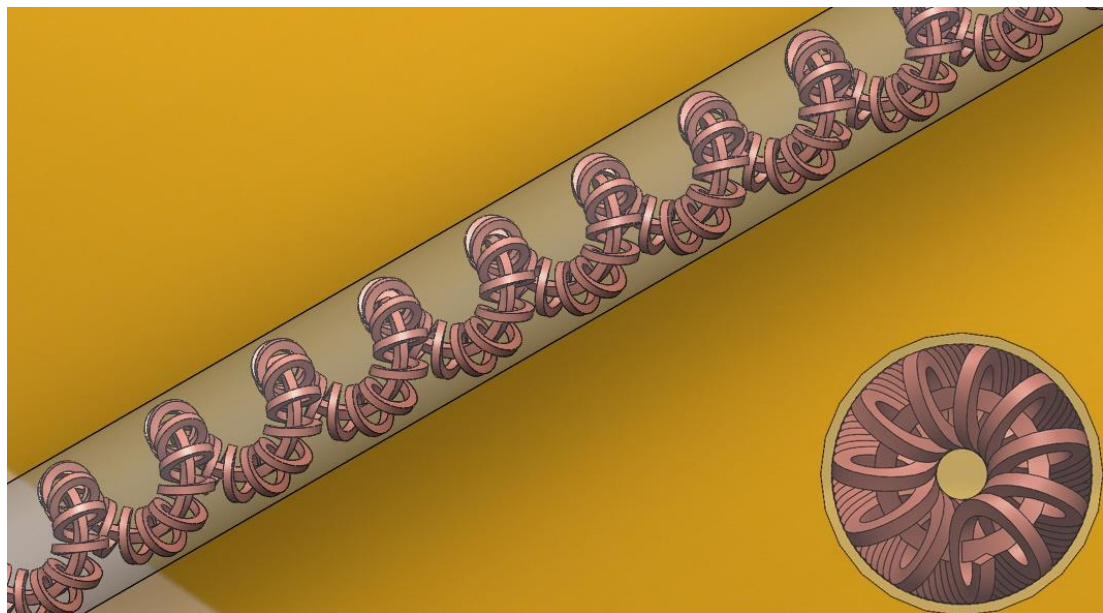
Geometry of the Square wire coil insert around Square wire coil in tube fitted type one
